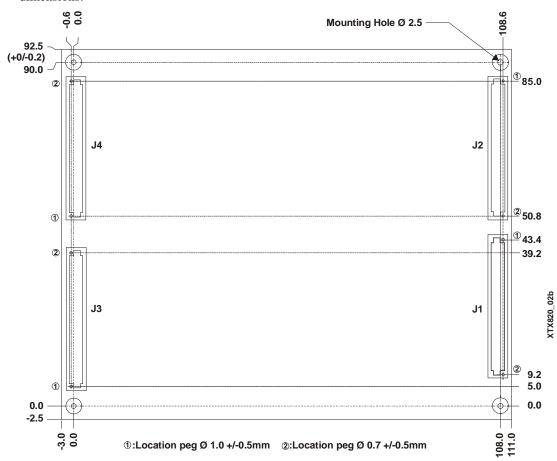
XTX 820 Dimensions (Top, Through Board View)
